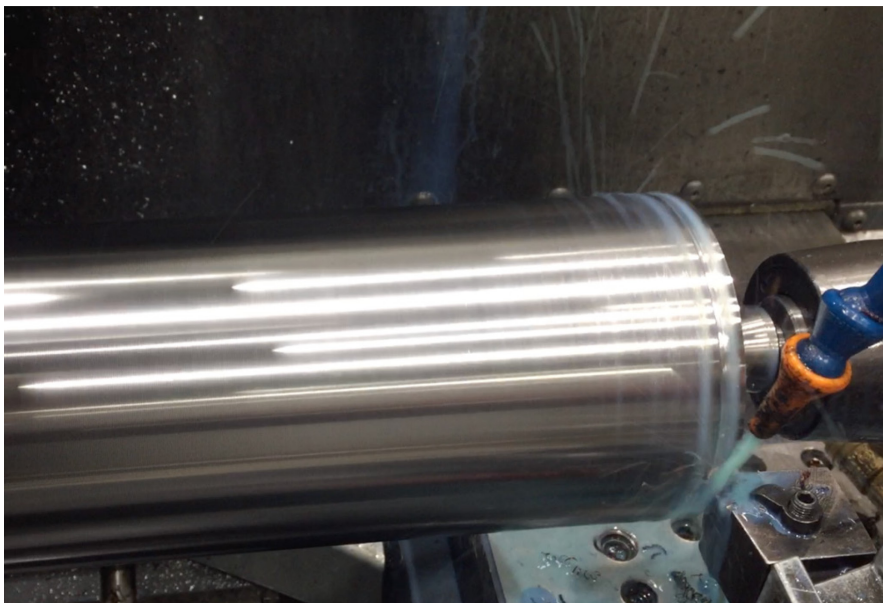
Experimental setup for flood-cooled machining on Haas TL-2 showing the position of the coolant nozzle relative to the cutting tool and workpiece. The cutting tool traverses along the axis of rotation from right to left.
